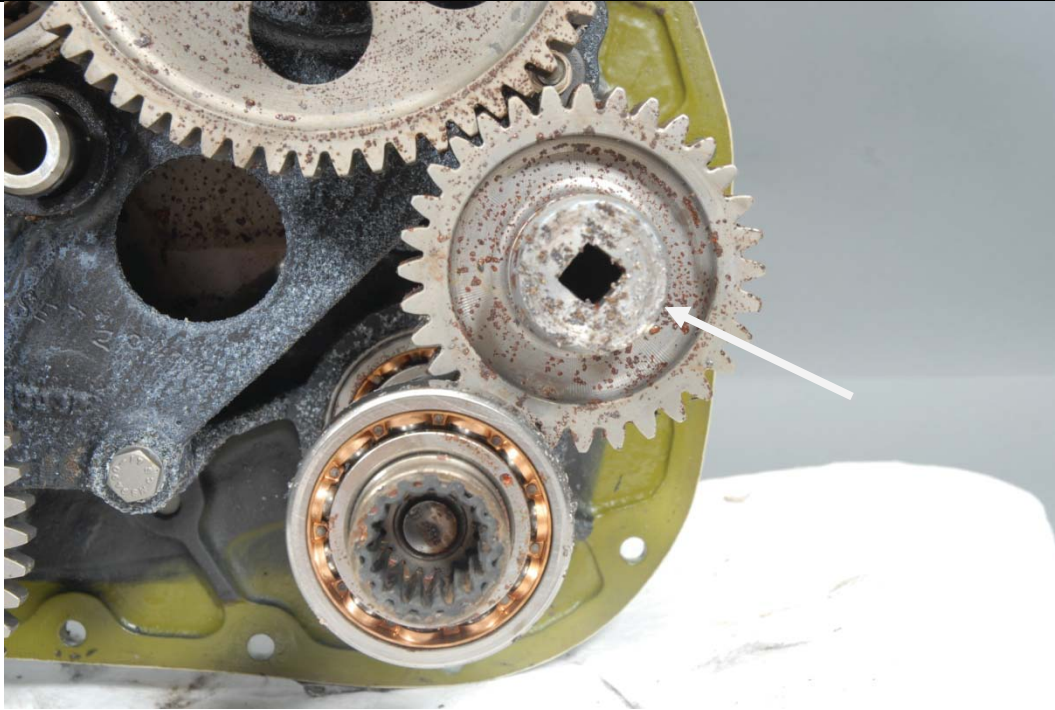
P-79297C, Starter/Generator Drive Gearshaft Assembly
